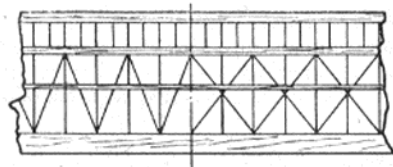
GEODETIC & WARREN GIRDER + RIBLETS.
